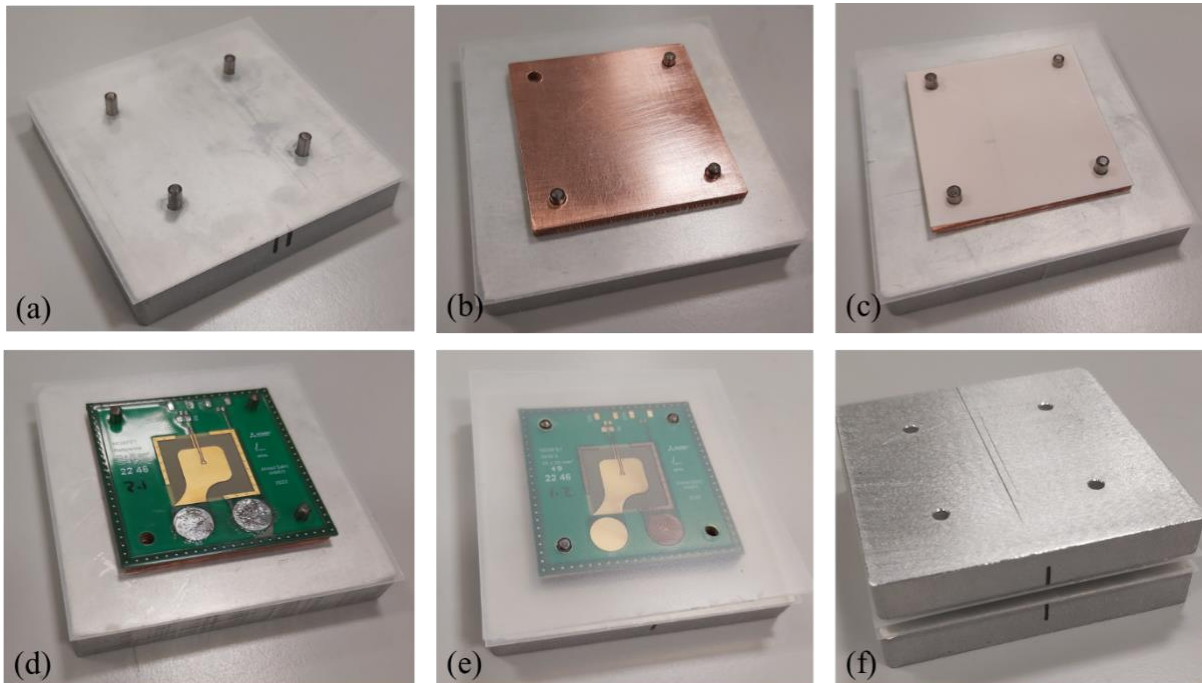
Stack-up steps: (a) placing the bottom conformable release sheet on the bottom aluminum plate. (b) placing the etched copper plate. (c) placing the prepreg layer. (d) placing the PCB. (e) placing the top conformable release sheet. (f) placing the top aluminum plate to contain the stack-up.
